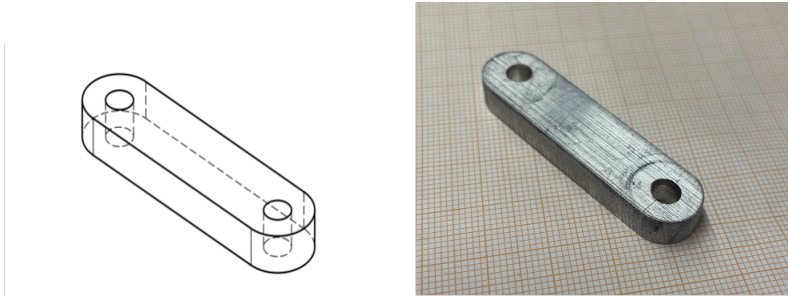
CAD Drawing (left) and as constructed (right) linkage
